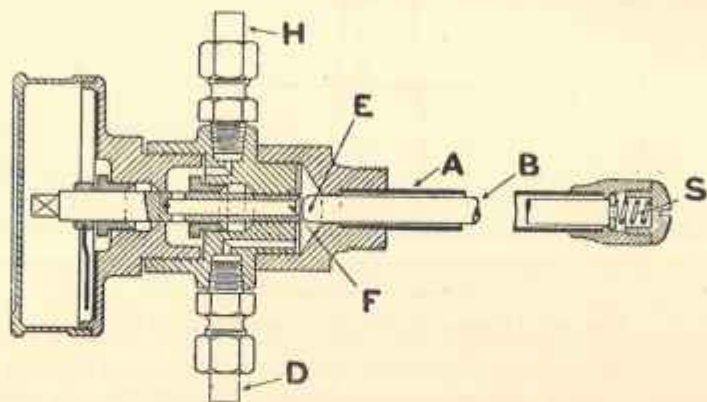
ROD AND TUBE THERMOSTAT, 1900.
